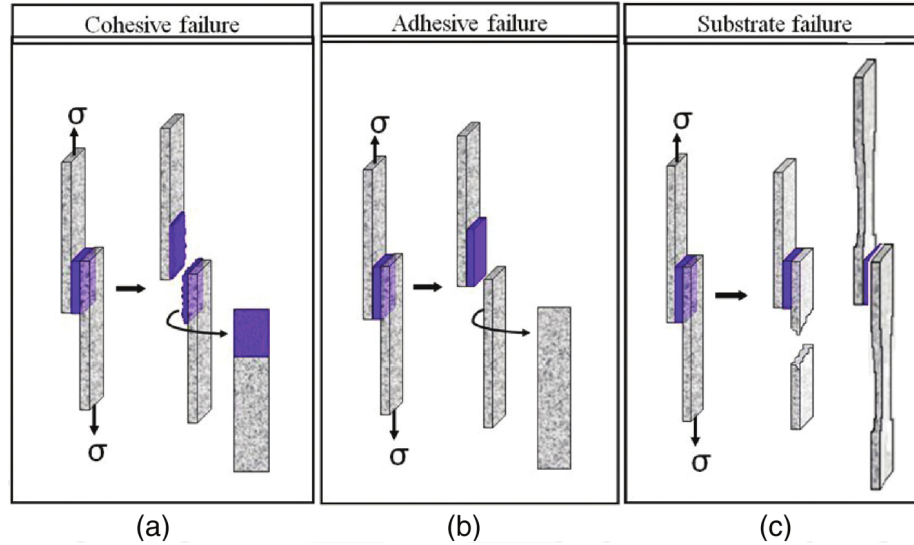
Types of adhesive bond failure of SLJ specimen [63]: a) cohesive failure, b) adhesive failure, c) adherent (substrate) failure.
